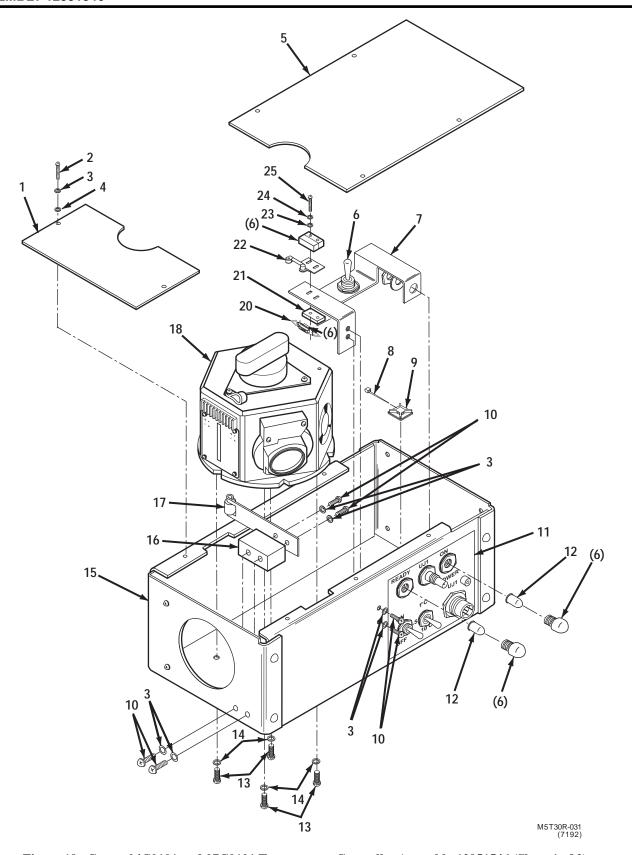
Group 04C0101 and 07C0101 Temperature Controller Assembly 12951546 (Sheet 1 of 2)
